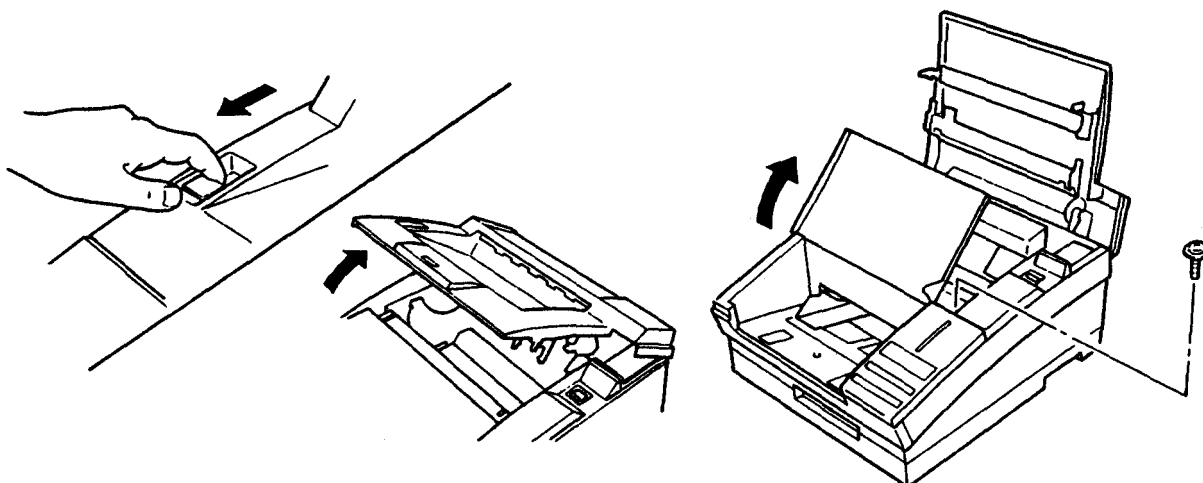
Opening the Upper Unit, Upper Cover and Removing 1 Screw
